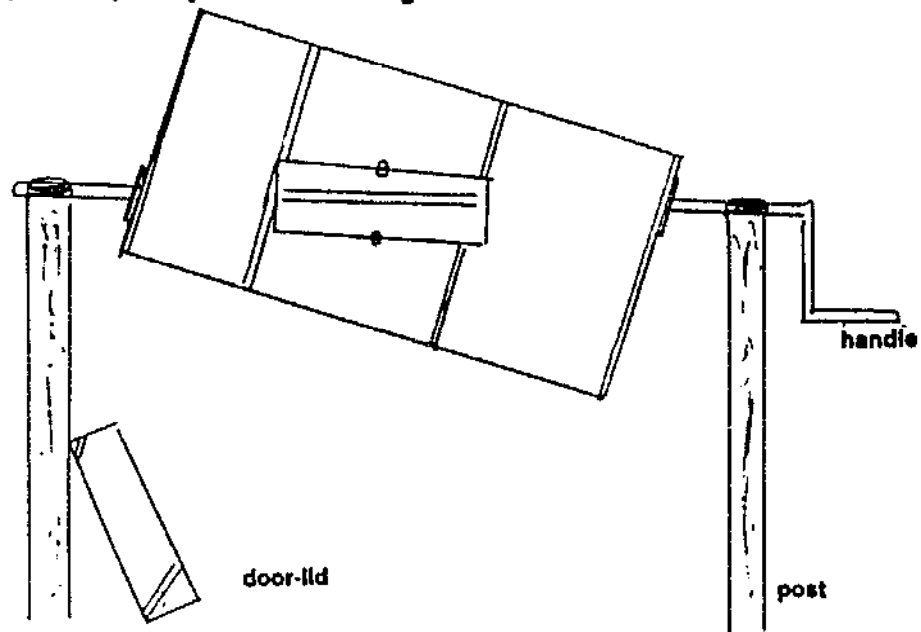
Another mounting for a clean 50 gallon oil drum requires a specially fabricated locking door
